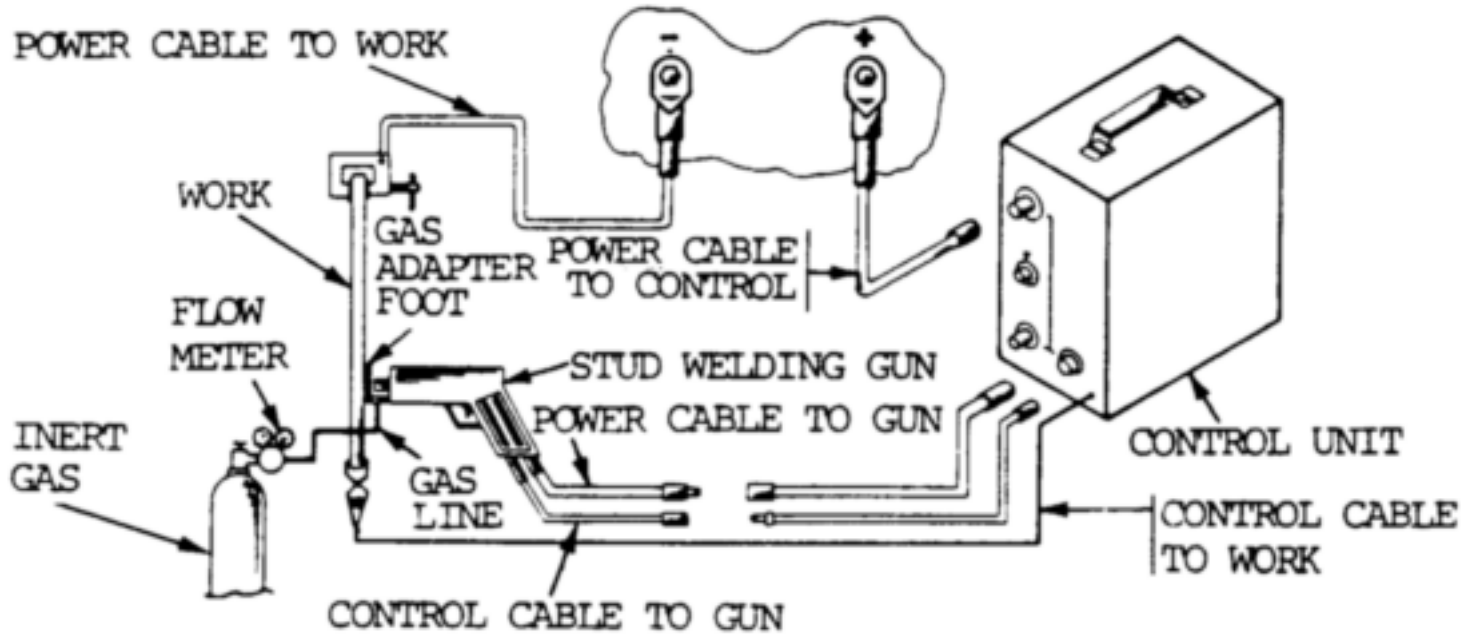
Equipment setup for gas shielded arc stud welding.
